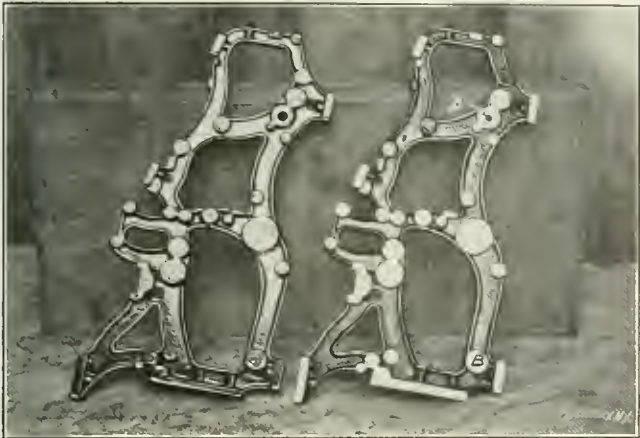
The Japanned Side Frames before and after Surfacing on the P. & W. Vertical Grinder, showing Center Spot for Locating First Drill Hole
